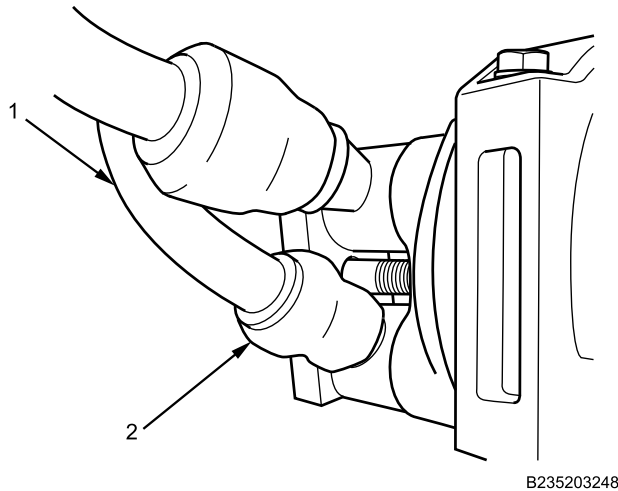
Compressor Discharge Outlet Heat Shrink Tubing
